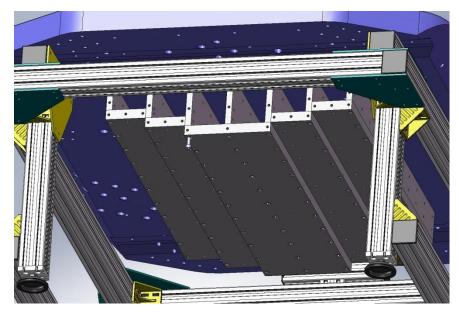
After both of the inner Type 01 horizontal plates are secured, install the center Type 00 horizontal plate. Snug the bolts, but do not torque, yet.
